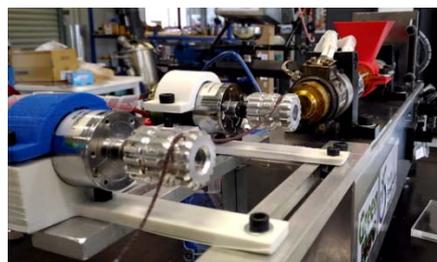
Overall extrusion process using GreenHero Mini-Extruder
